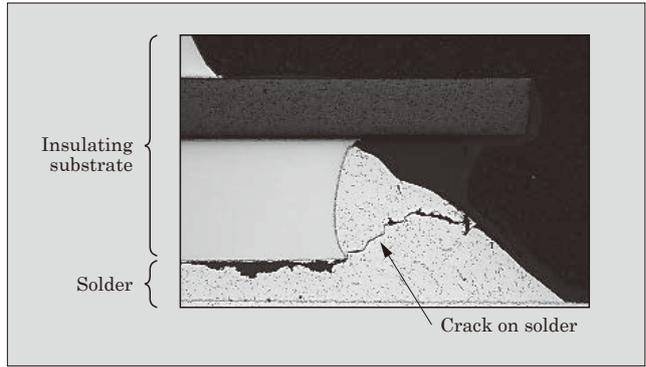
Fracture condition of solder joint under insulating substrate after thermal cycle test
